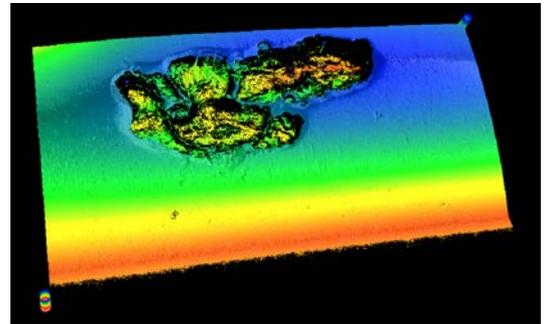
Optical interferometry characterization of pitted gear tooth flank.
